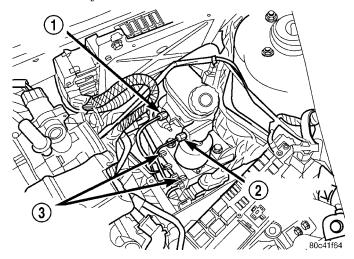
Brake Tubes At Master Cylinder - W/ABS
